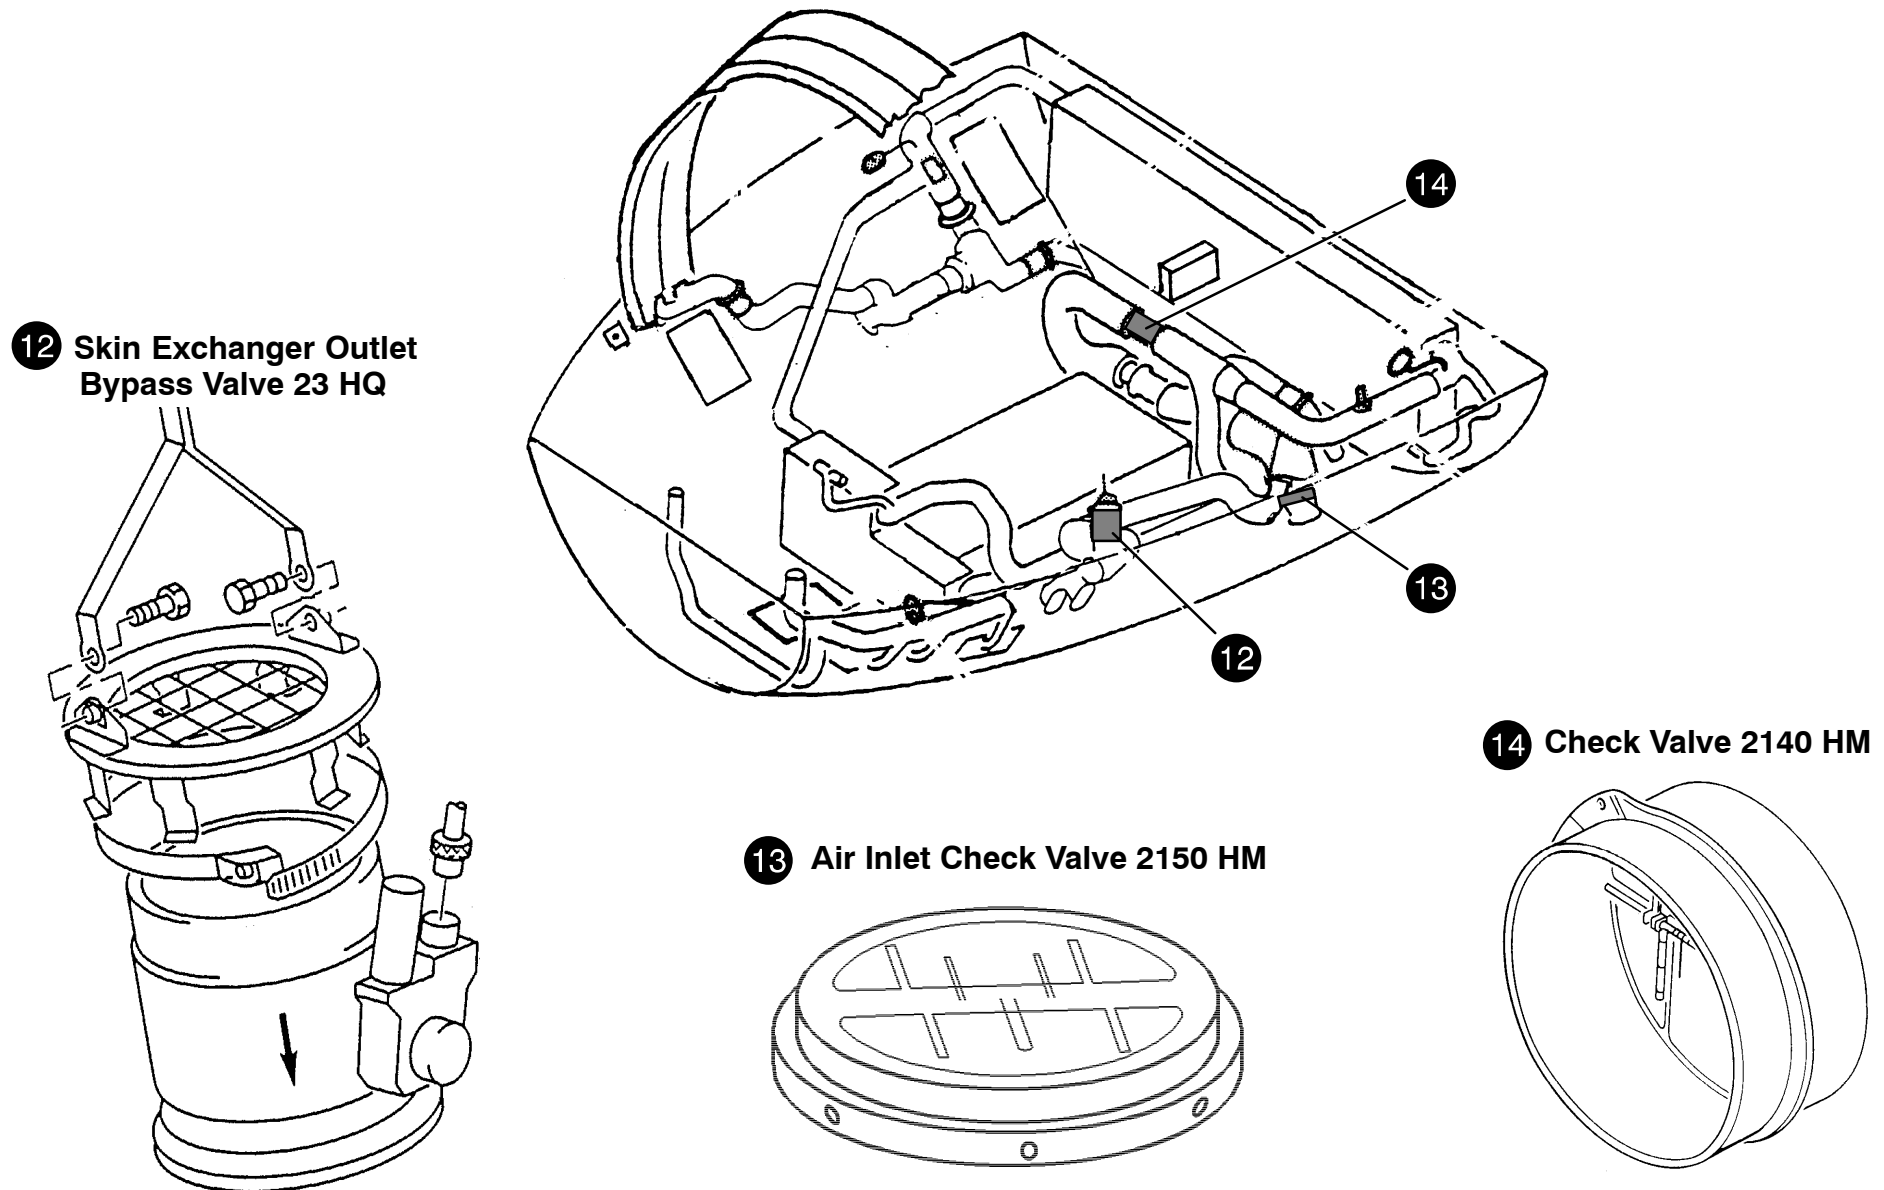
Skin Exchanger Outlet Bypass Valve & AEVC Check Valves
